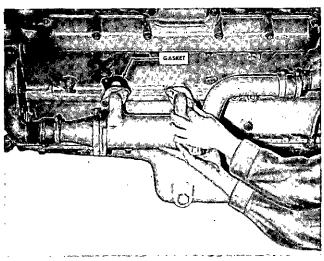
Installing oil cooler - V8-350/VT8-430
